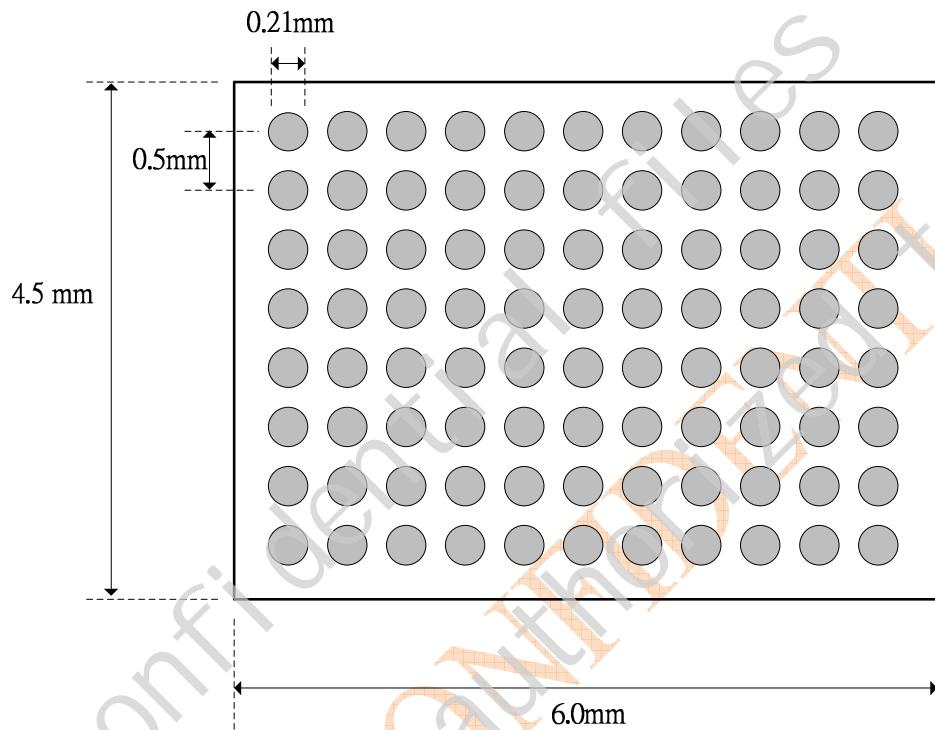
Suggested Stencil Open for SMT Soldering on EP Pad
